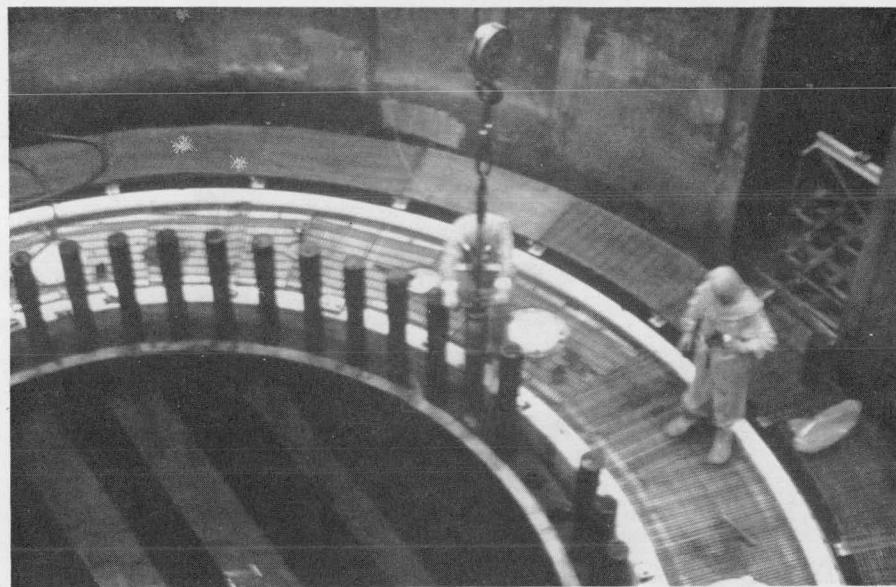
Removing Head Flange O-Ring (Browns Ferry)
